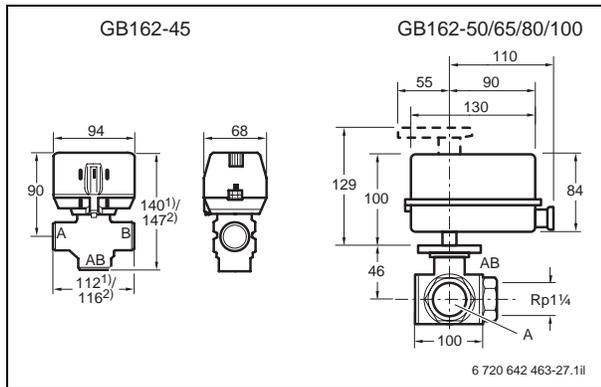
Dimensions of the external 3-way diverter valves for the Logamax plus GB162-45 and GB162-50/65/80/100
